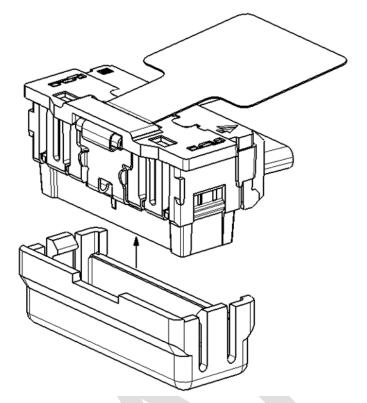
Free-Side Connector & Dust Cover Assembly Direction
